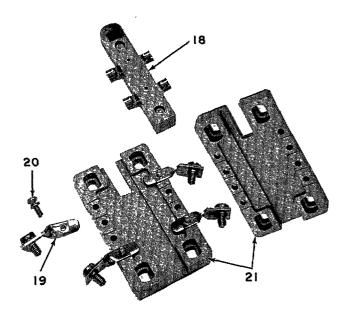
IC5181-C106 a-c contactor, size 6, auxiliary contacts
